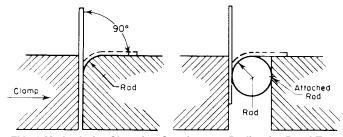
Methods for Clamping Specimen to Radius for Bend Test
